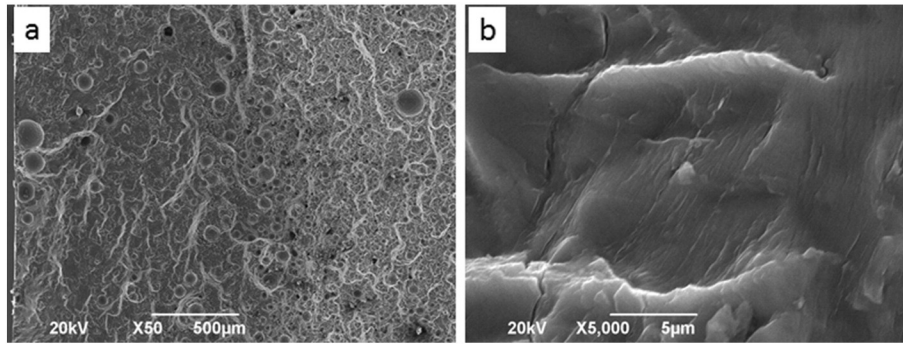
Fracture morphologies of welded joints of 90% humidity. (a) Crack source zone; (b) crack propagation zone.
